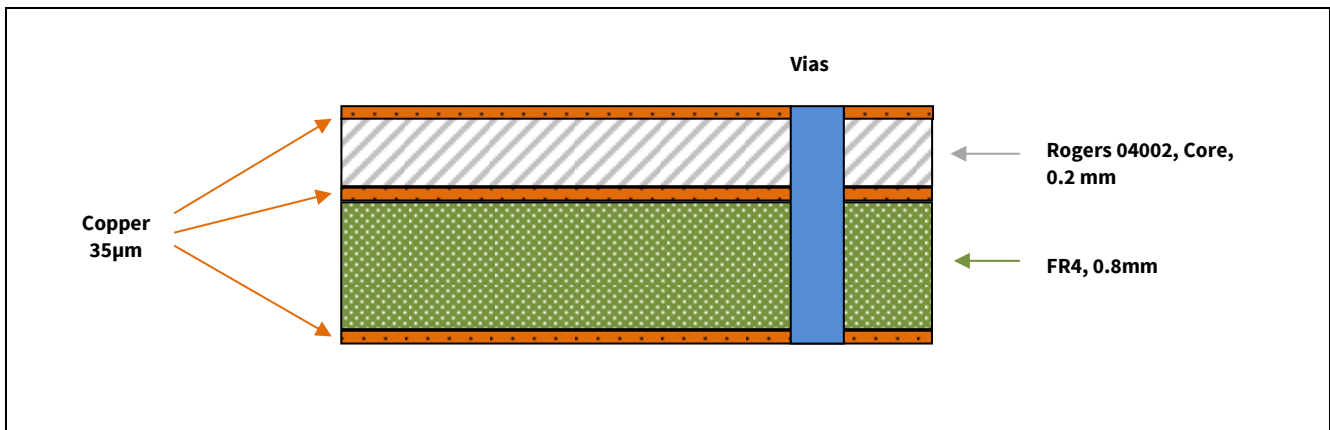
PCB crosssection of the evaluation board for BGS13S2N9
